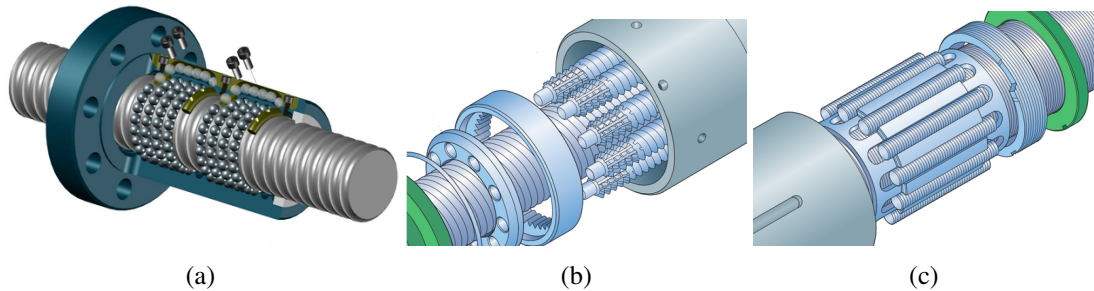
Screw mechanisms: (a) ball screws, reproduced with kind permission from BARNES Industries Ltd. [227], (b) planetary roller screws, and (c) recirculating roller screws, reprinted with kind permission from SKF Group [228].
